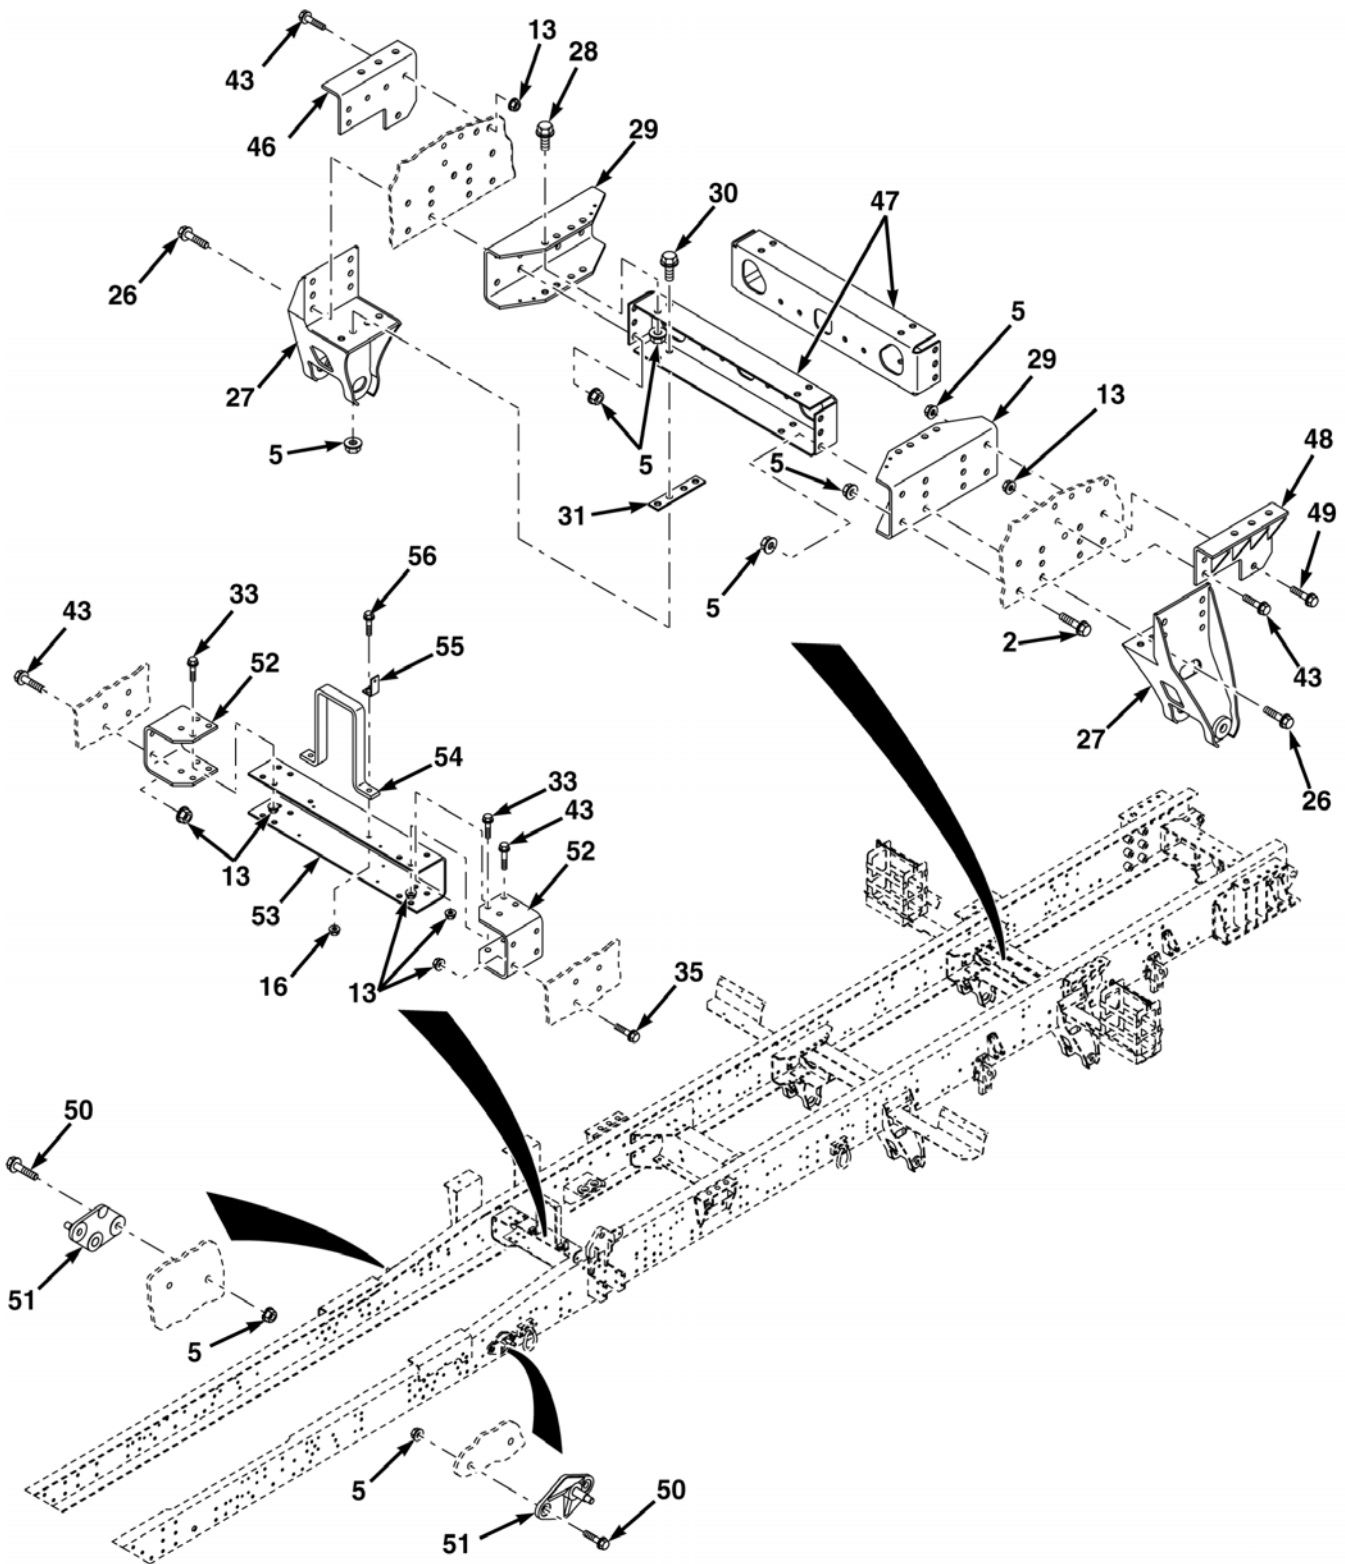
FRAME ASSEMBLY (SHEET 3 OF 5)
